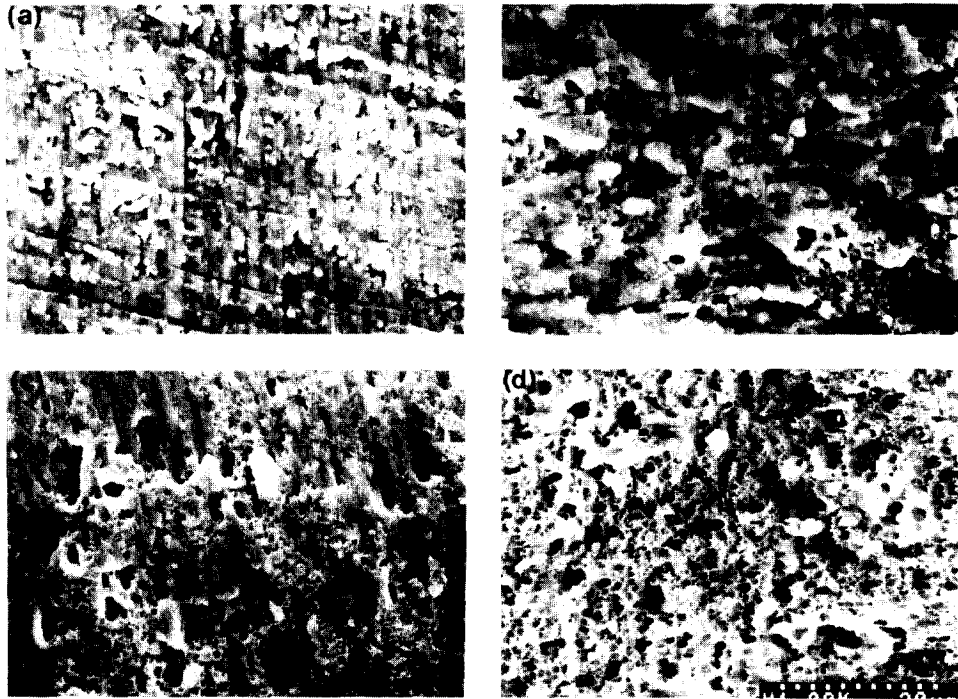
Fracture surface of bond line failure, bonded at 540°C, 3 hrs.
